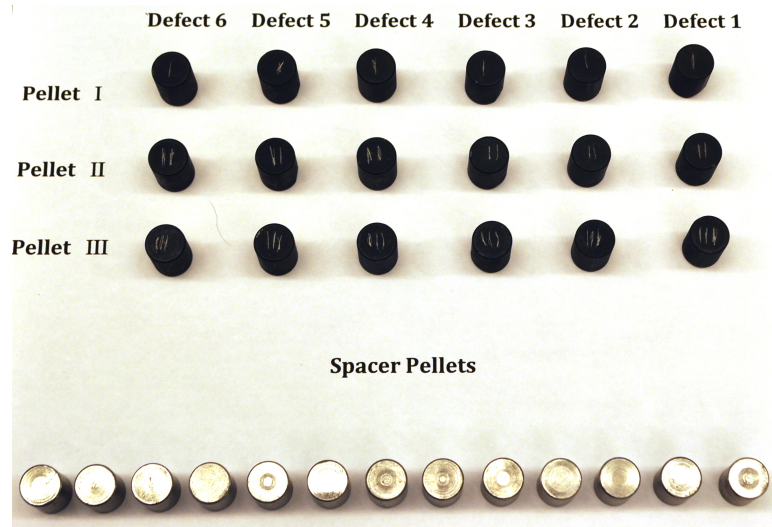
Pseudo Test Pellets with Defects Queued Up for Testing
